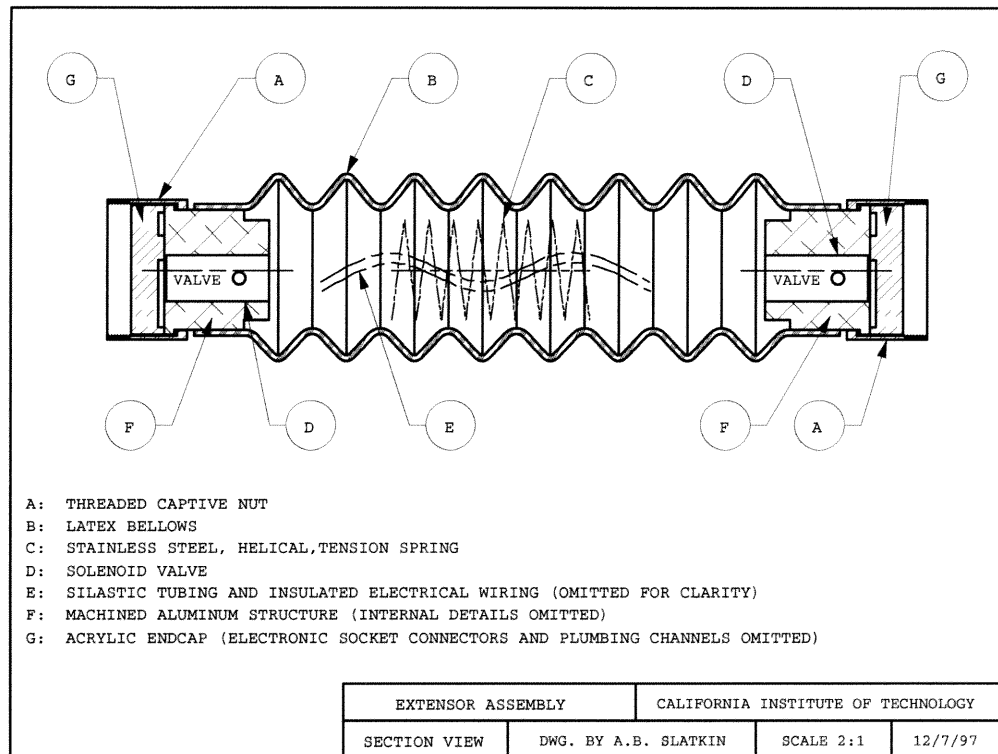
Schematic section view of a Generation Five extensor segment assembly.
